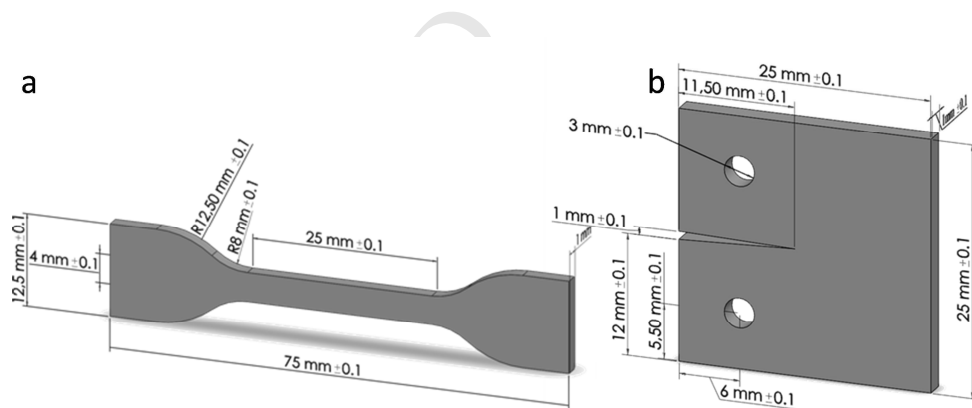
Specimen geometry for (a) uniaxial tensile tests (dumbbell-shaped sample); and, (b) fracture toughness tests (compact tension sample); both samples with a thickness of 1mm .
